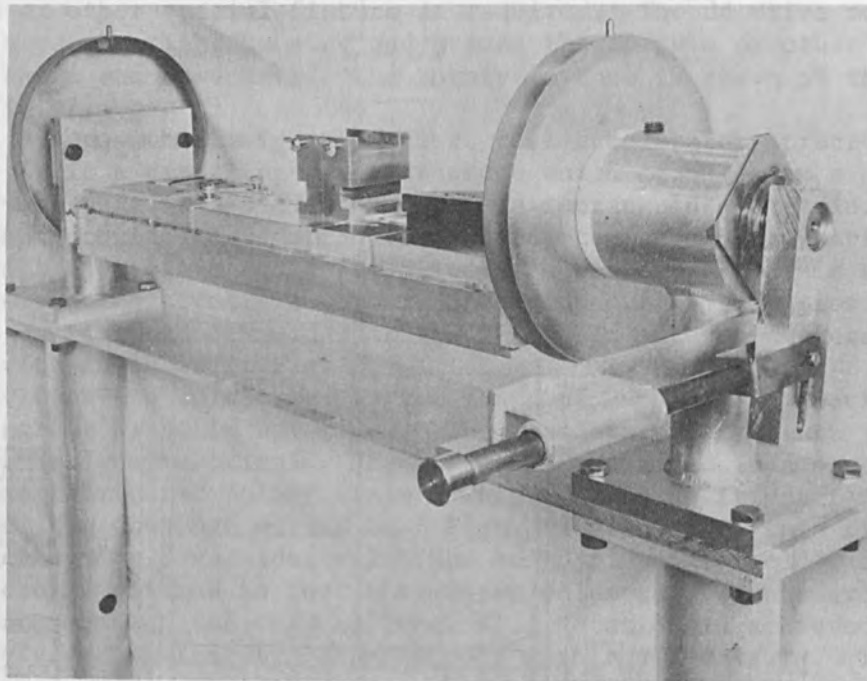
Indexing fixture for welding rectangular waveguide.
